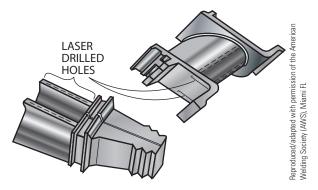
Jet engine blades and a rotor component showing laser-drilled holes.
